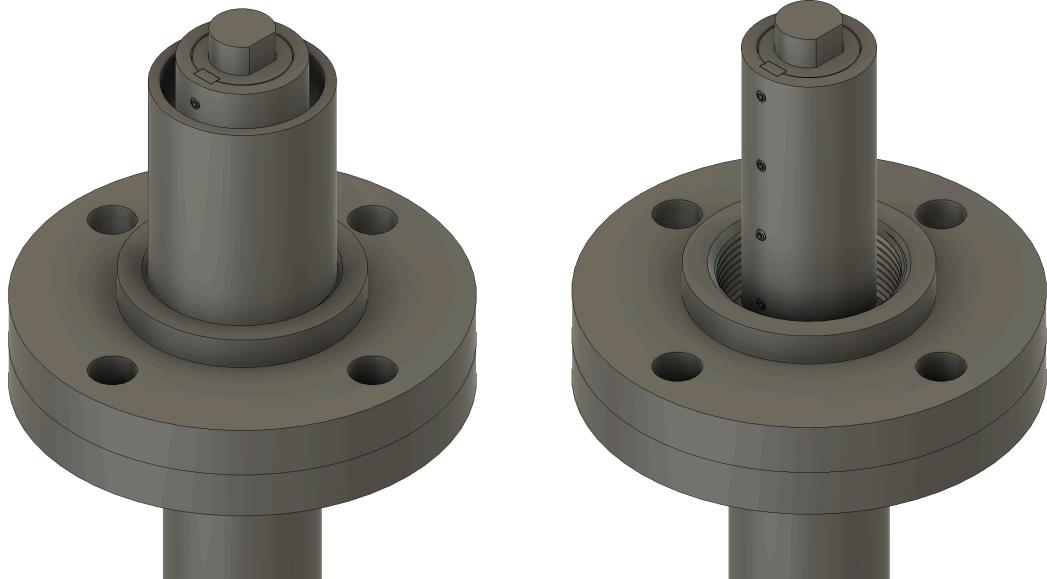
Coupling system from motor shaft to lower unit shaft with set screws in place.
